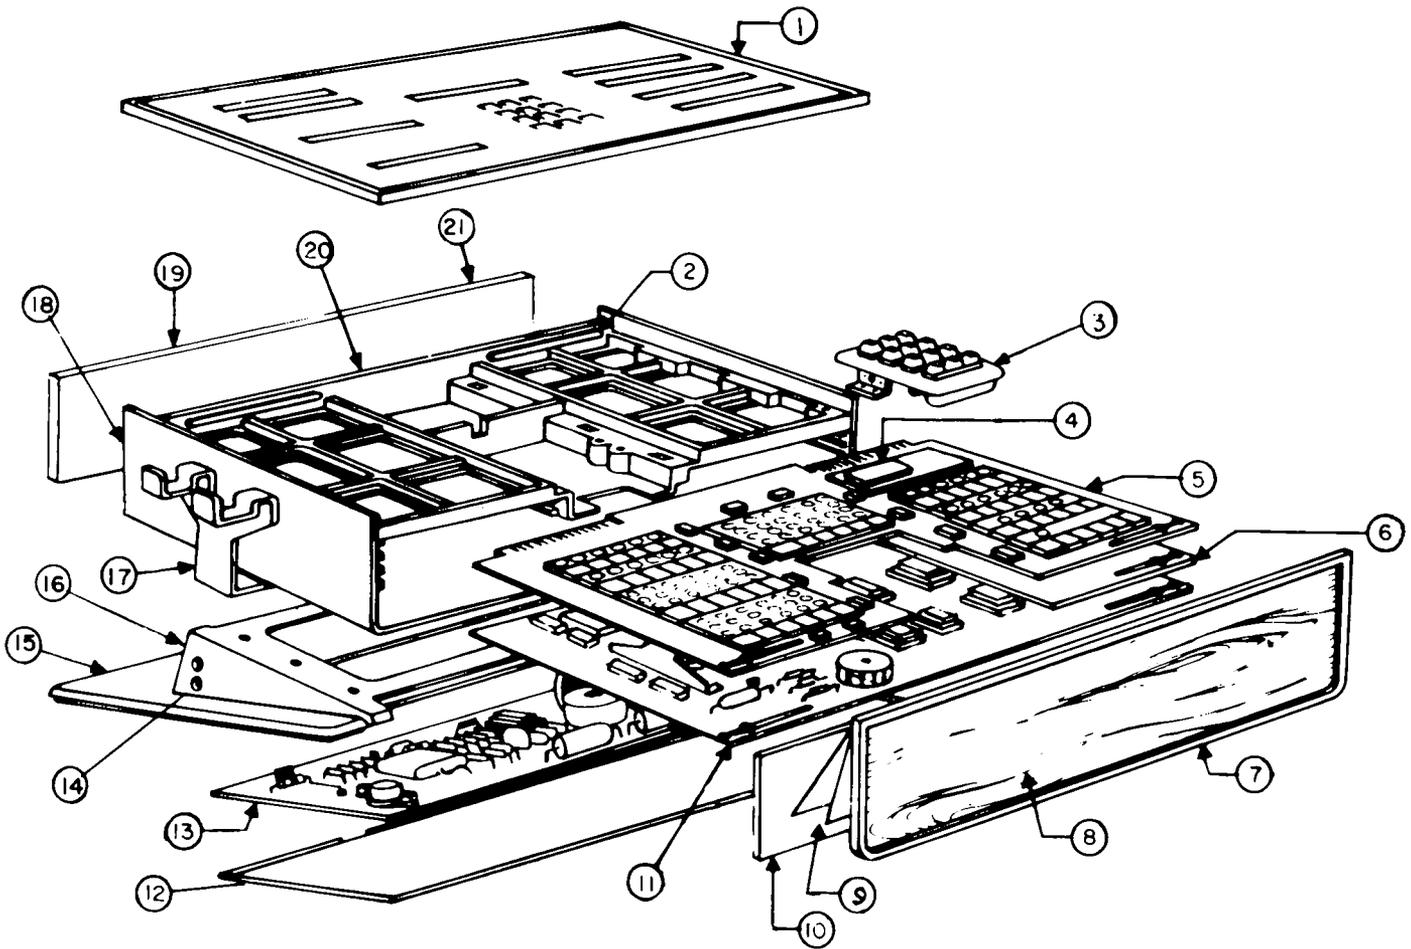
Attendant Console Without ADSS/BLF—Exploded View
